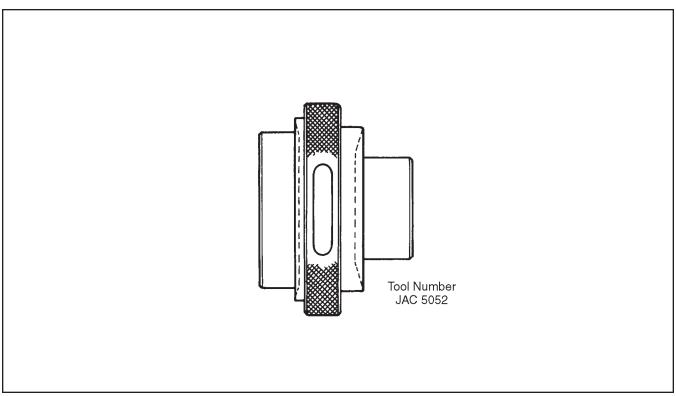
A-1. Seal Installation Tool (Front Traction Motors)
